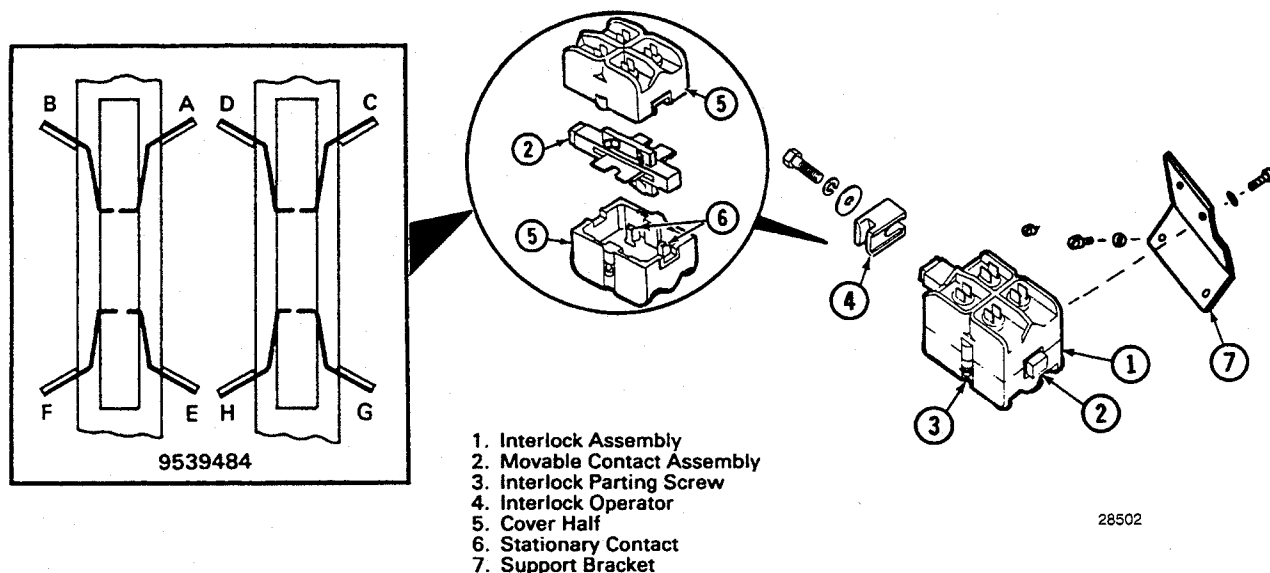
Auxiliary Interlock Assembly, Partial Exploded View
